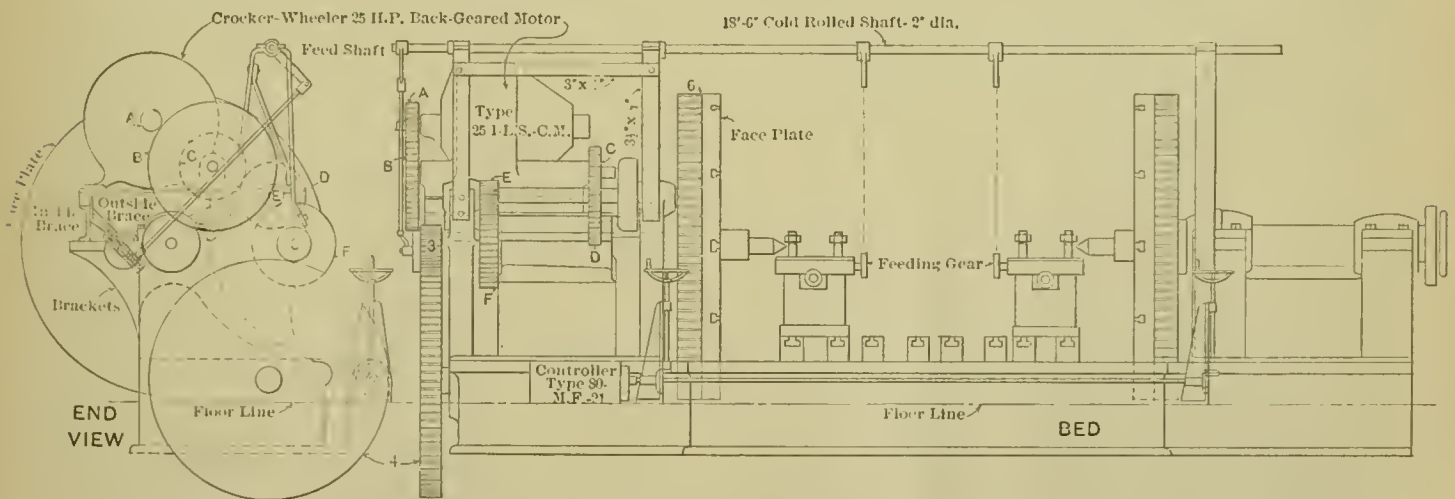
DETAILS OF APPLICATION OF INDIVIDUAL MOTOR-DRIVING TO THE 72-INCH NILES DRIVING WHEEL LATHE.—CROCKER-WHEELER MULTIPLE-VOLTAGE SYSTEM.
